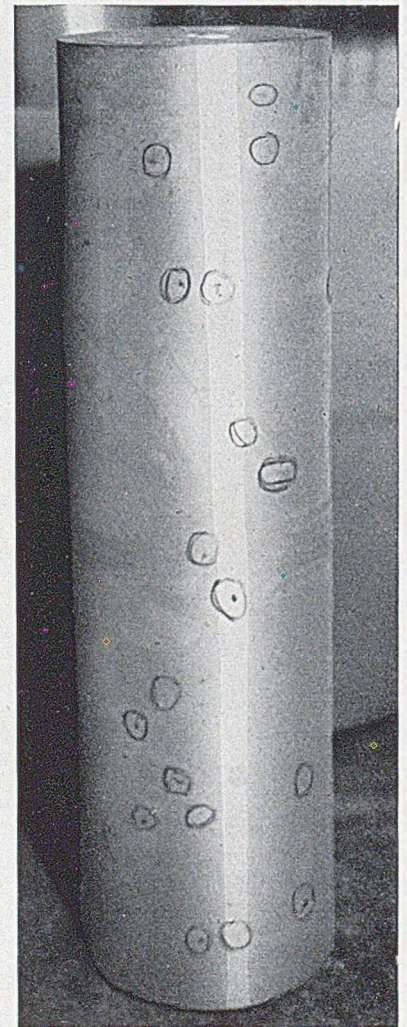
Flux Inclusions in a Billet of AZ855 Alloy Disclosed in Machining.
